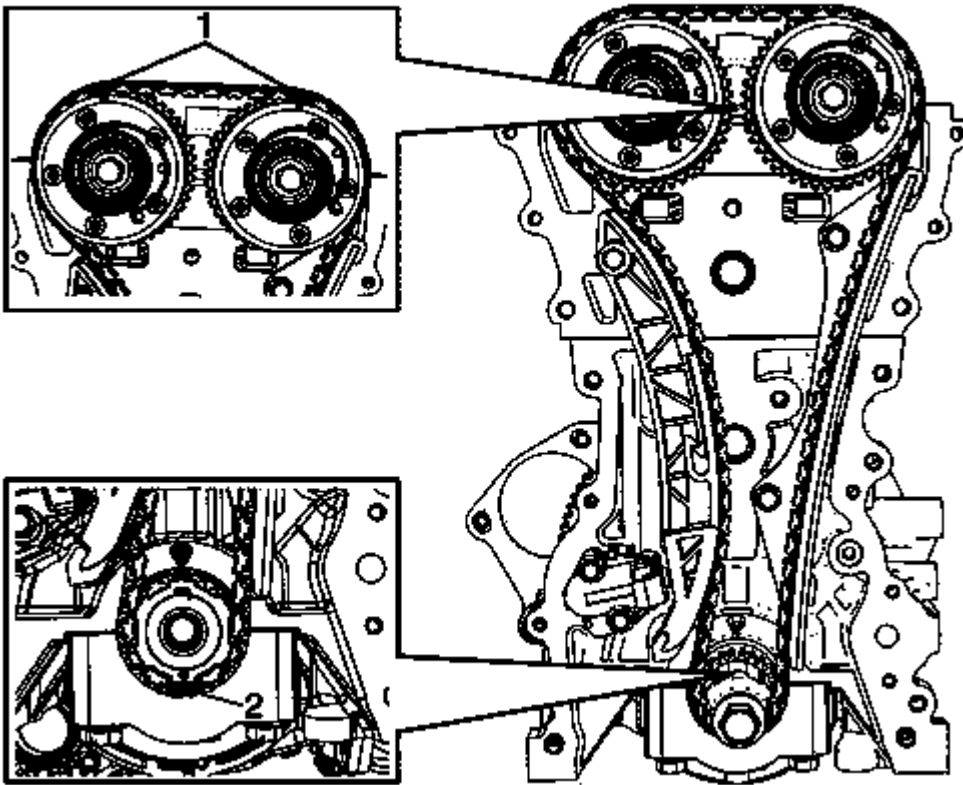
Rotating Crankshaft To TDC (Top Dead Center) Position
